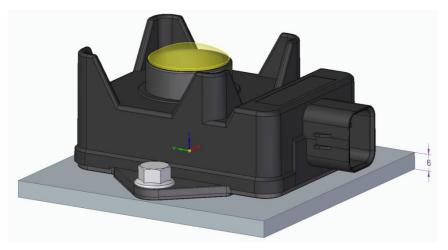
Mounting on a thick soft steel plate (≥6mm).
